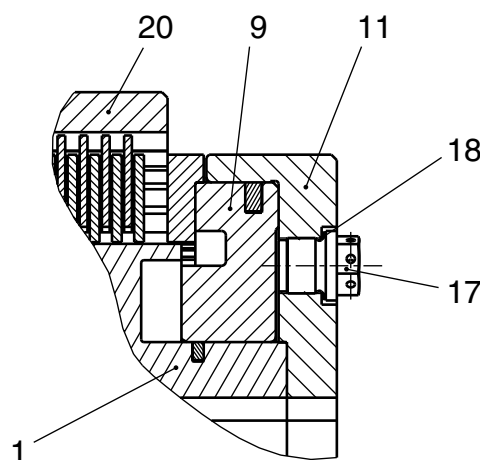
Variant 1 - Clutch with emergency engagement system
